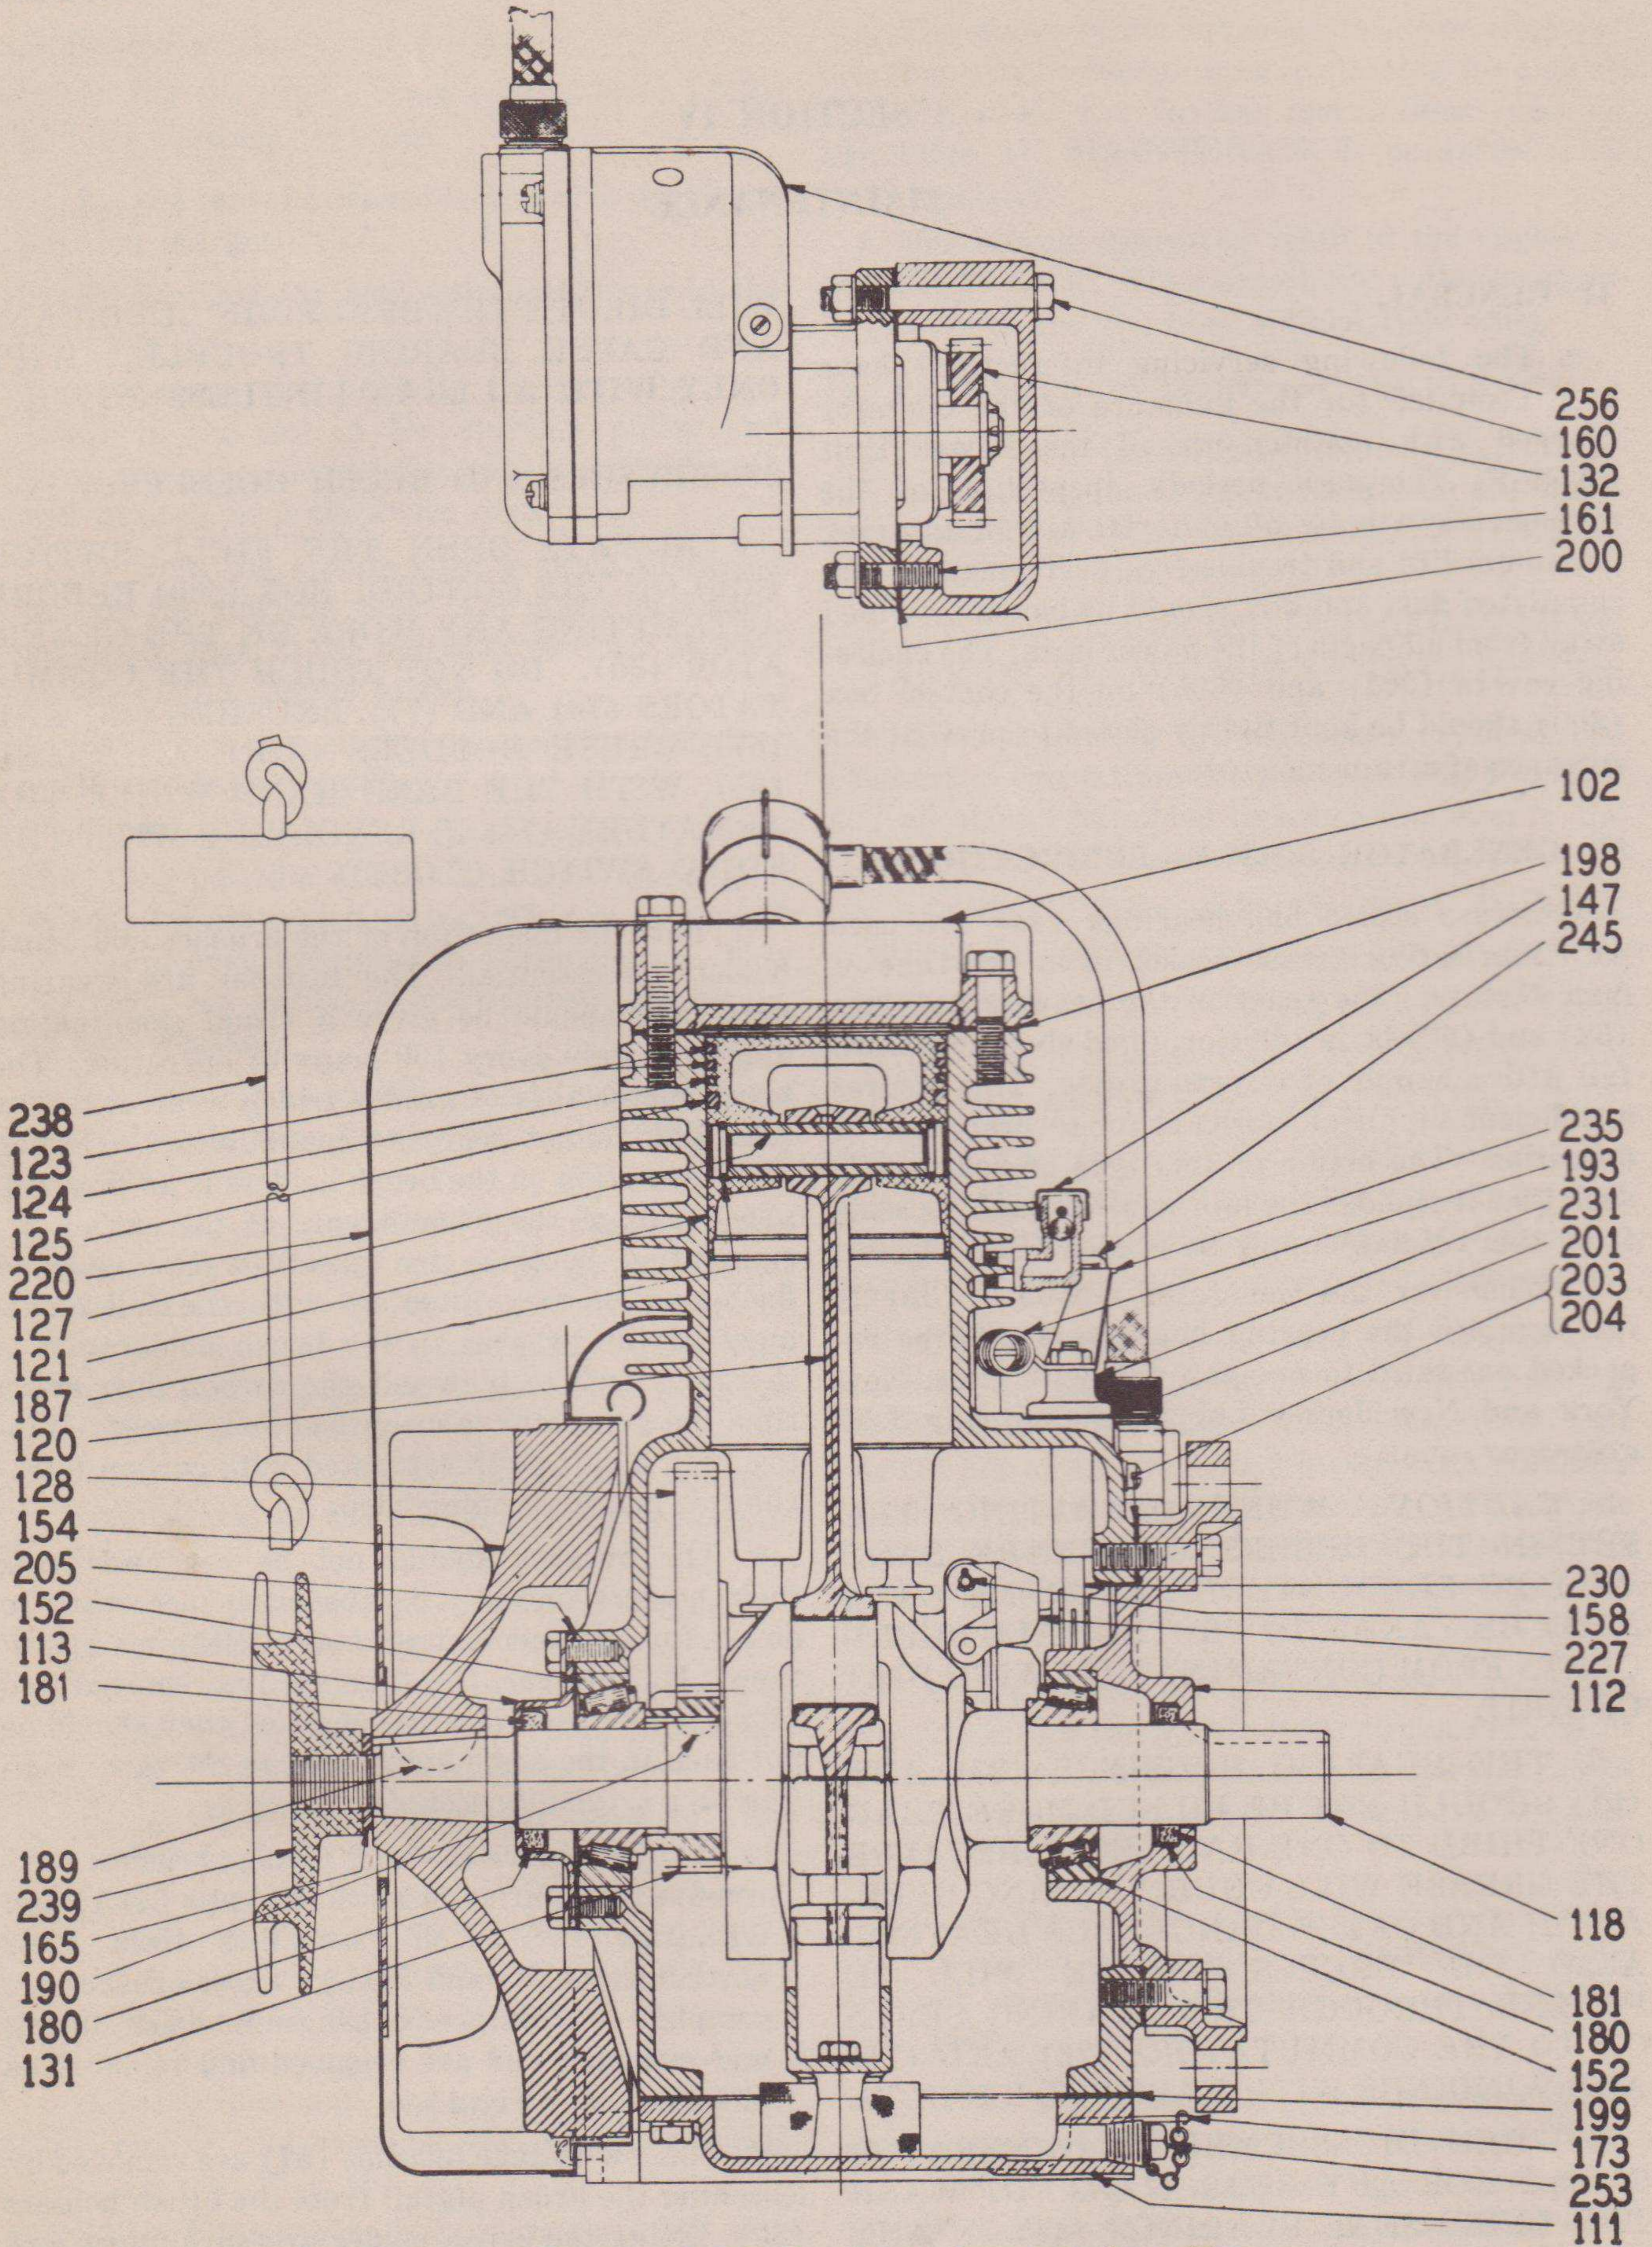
ENGINE GE-9-F—CROSS SECTION SIDE VIEW
